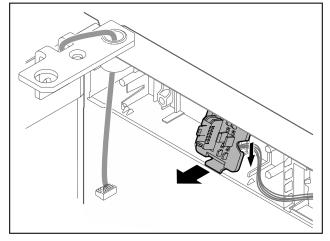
The installation position of the plug holder can be rotated by 180°.
